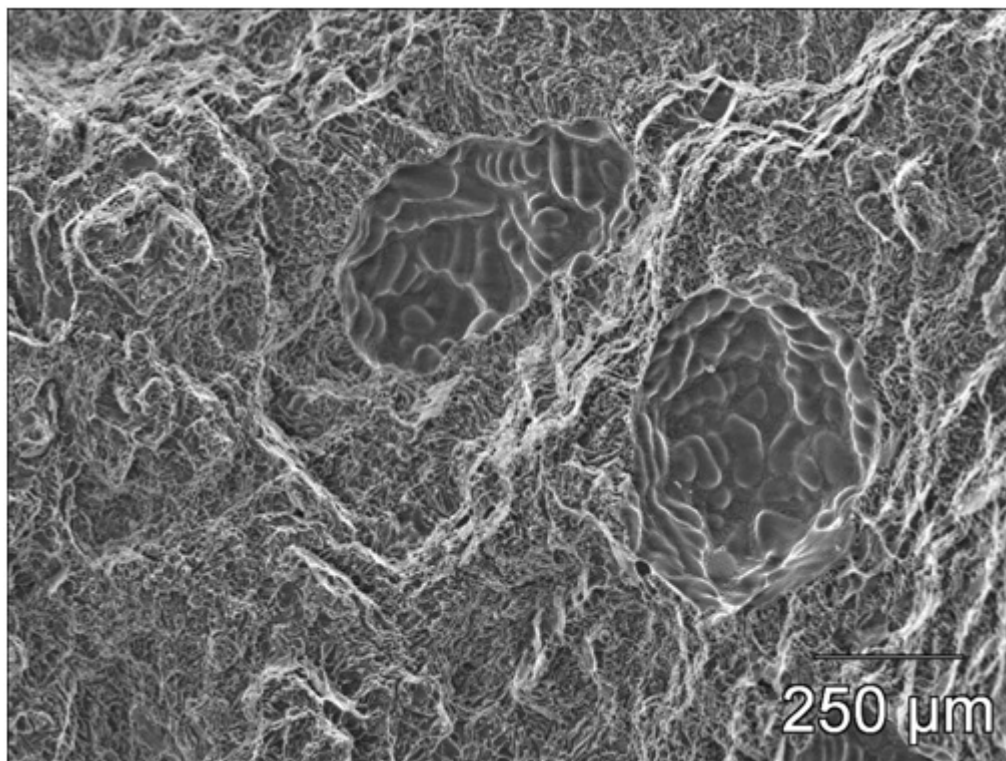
Fracture surface of machined 356-T7 tensile test specimen.
